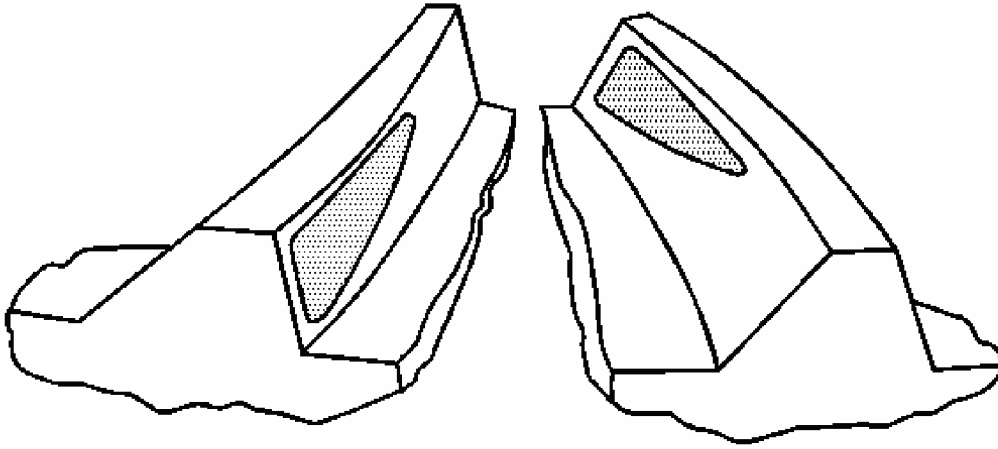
Identifying Drive Side Heel - Coast Side Toe Contact Pattern
